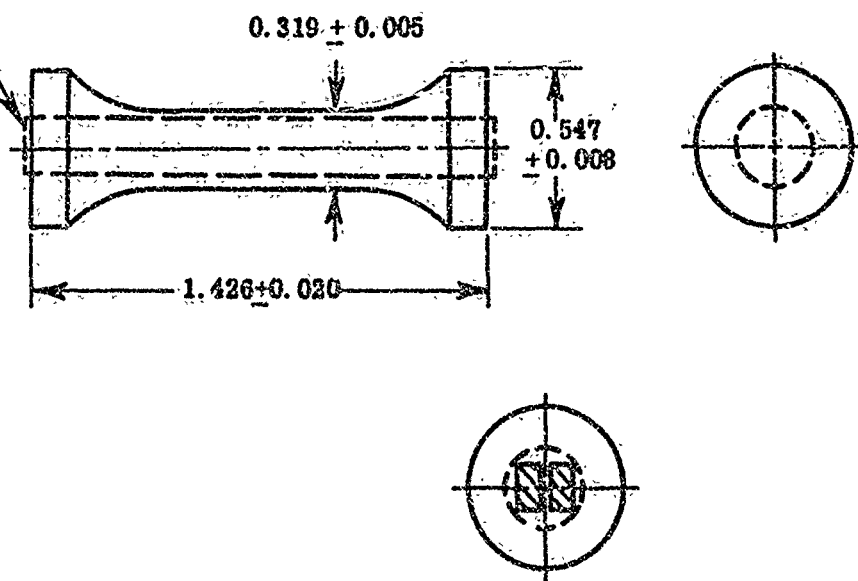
Configuration of Specimen Blanks 1A06 as Received from Coors and Cutting Plan for Removing Phase I Macro Tensile and Macro Flexural Specimens
